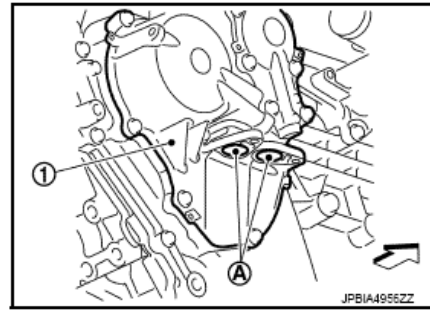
Locating Valve Timing Control Cover And Solenoid Valve Hole
